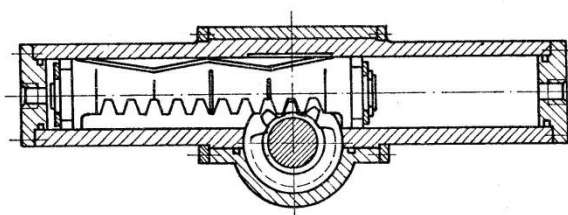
Hydraulic motor with toothed rack and pinion (the principle is used e.g. for slewing mechanisms of hydraulic cranes) (Bauer, Ryšavý, 1985)
